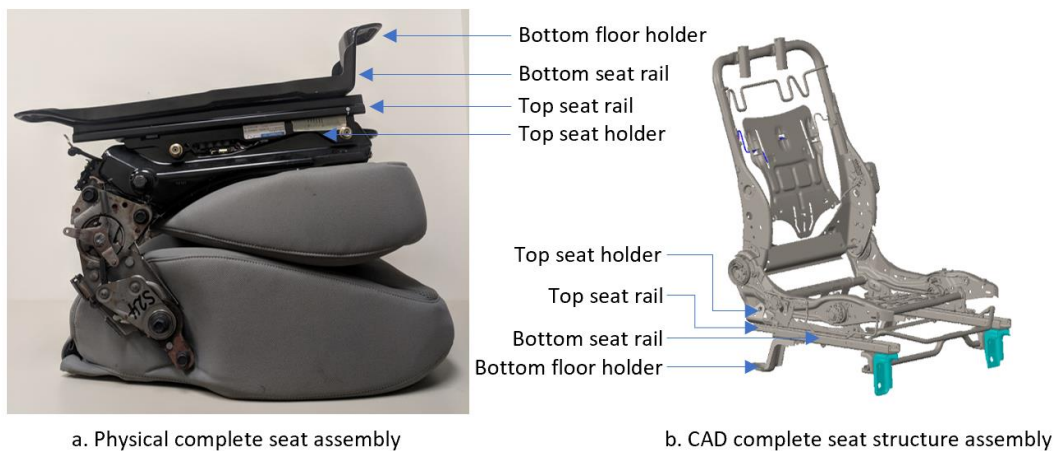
Complete physical/CAD seat labelled with seat rail assembly parts⁴
